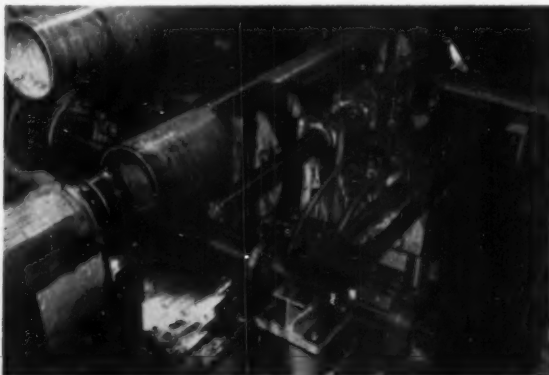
Method of expanding used at the Lorain Works, Lorain, Ohio. The expander plug is shown in position before entering seamless pipe. The plug is at the end of a 60-ft ram made of 14-in. seamless pipe.
